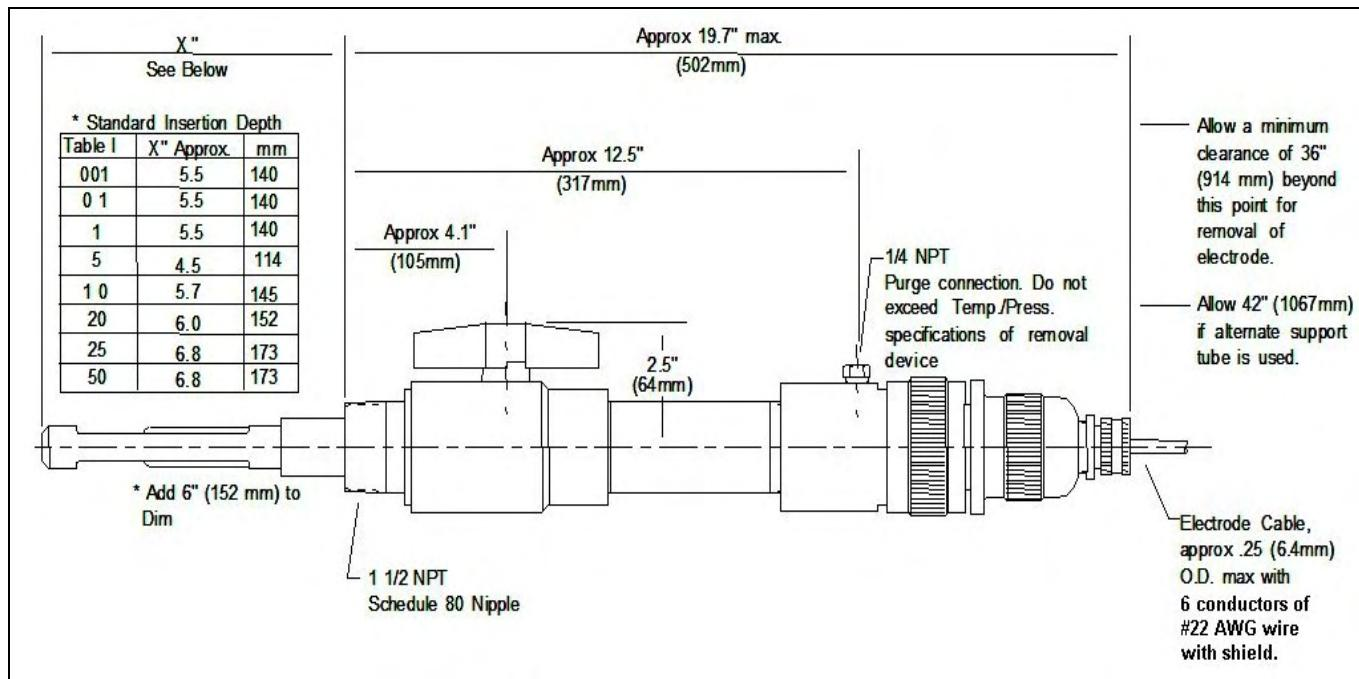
Outline and dimension drawing for Conductivity Cell, Insertion Type with CPVC Removal Device with 20' cable
